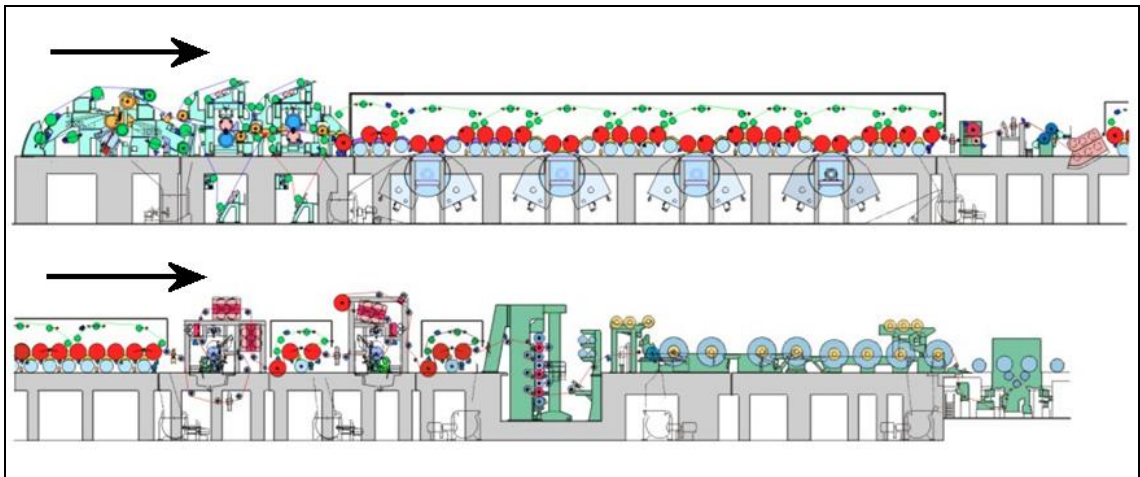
Combined paper machine and coater (Metso Paper Inc.).
